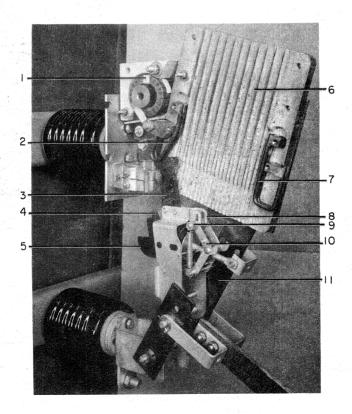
Cutaway View of SE-9 Switch Shown in Tripped Position
